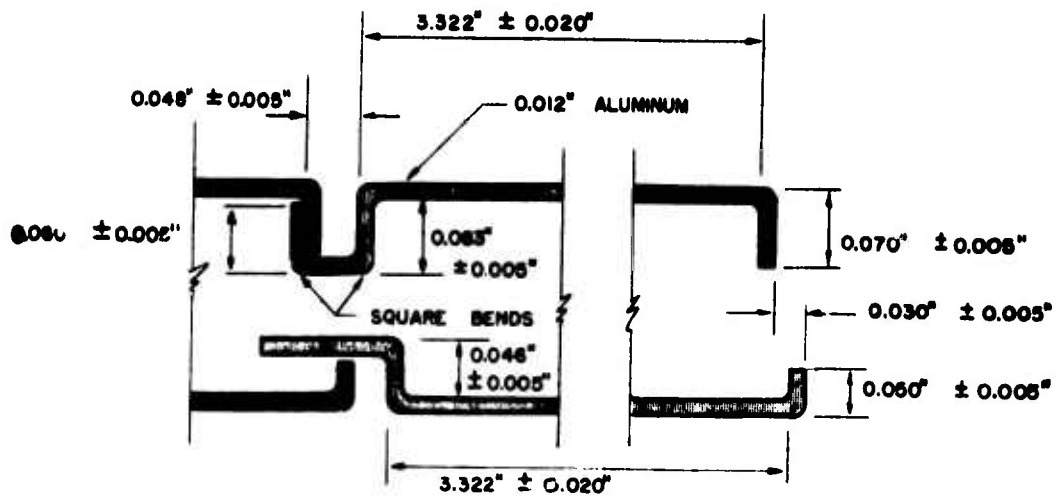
Longitudinal Joint Detail of Model AM2 Landing Mat.
